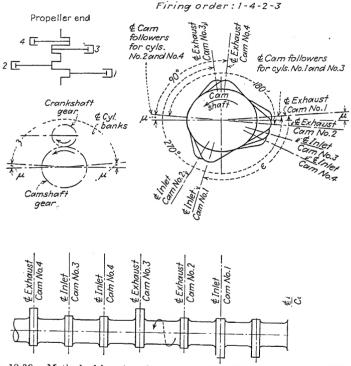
Method of locating the cams on the camshaft of a four-cylinder opposed engine.
